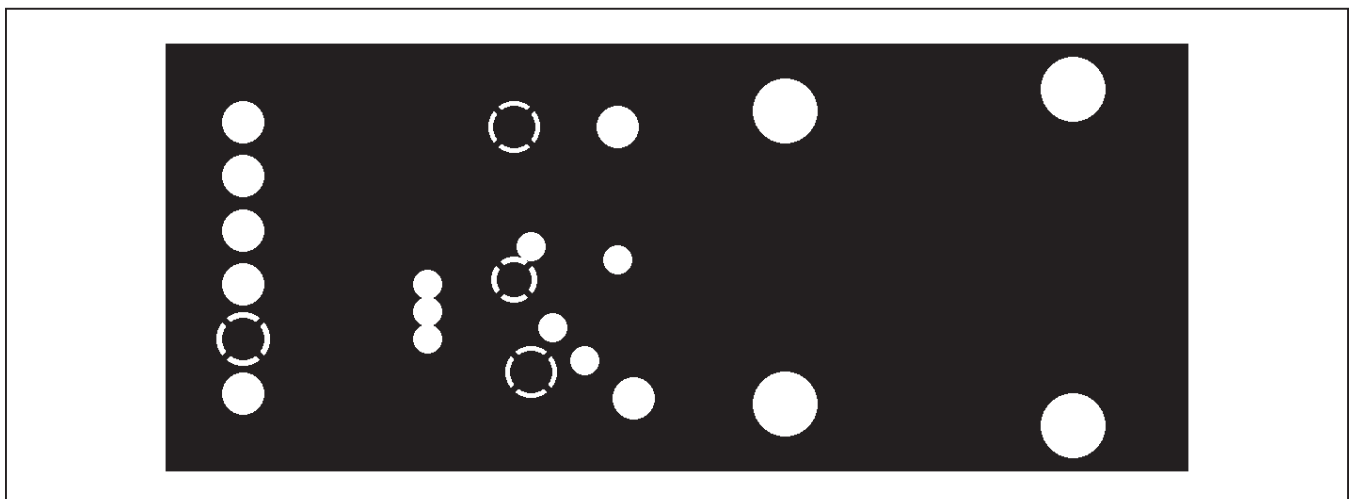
MAX31855PMB1 Peripheral Module PCB Layout—Inner Layer 1 (Ground)
